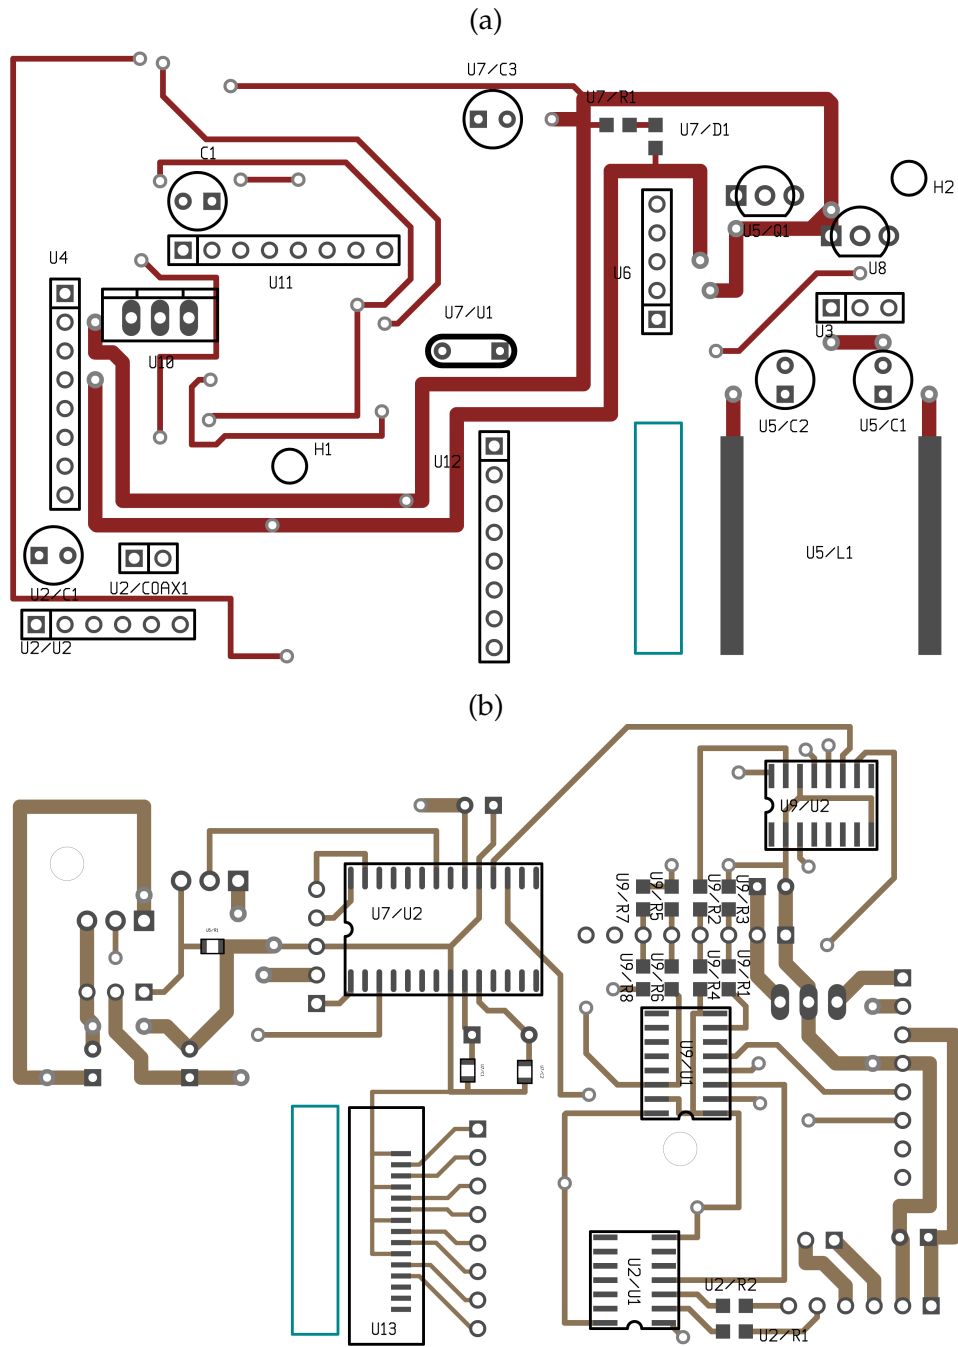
Physical Layout of Top (a) and Bottom (b) Layers
